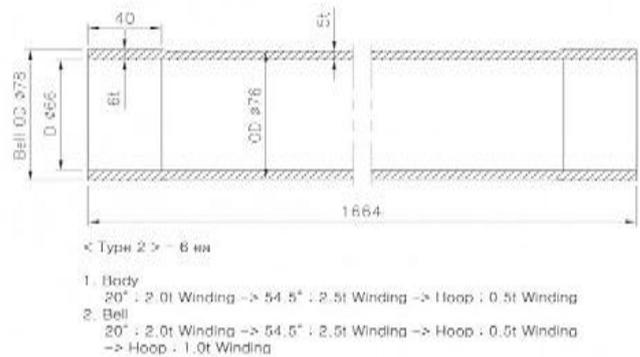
Design drawing of the Propeller Shaft made of Carbon Composite Fiber
